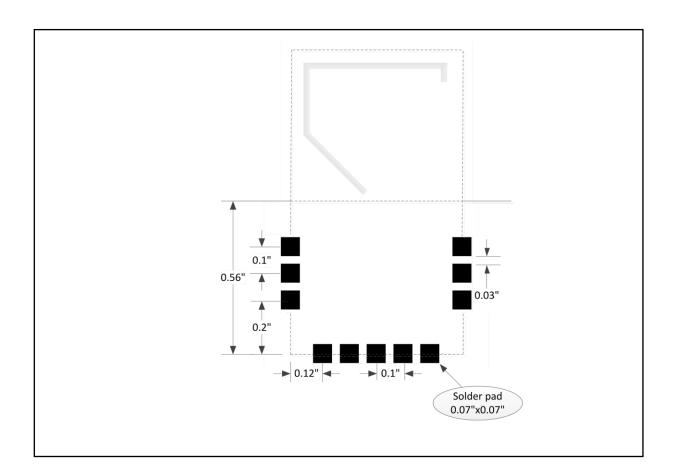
RECOMMENDED PCB FOOTPRINT
